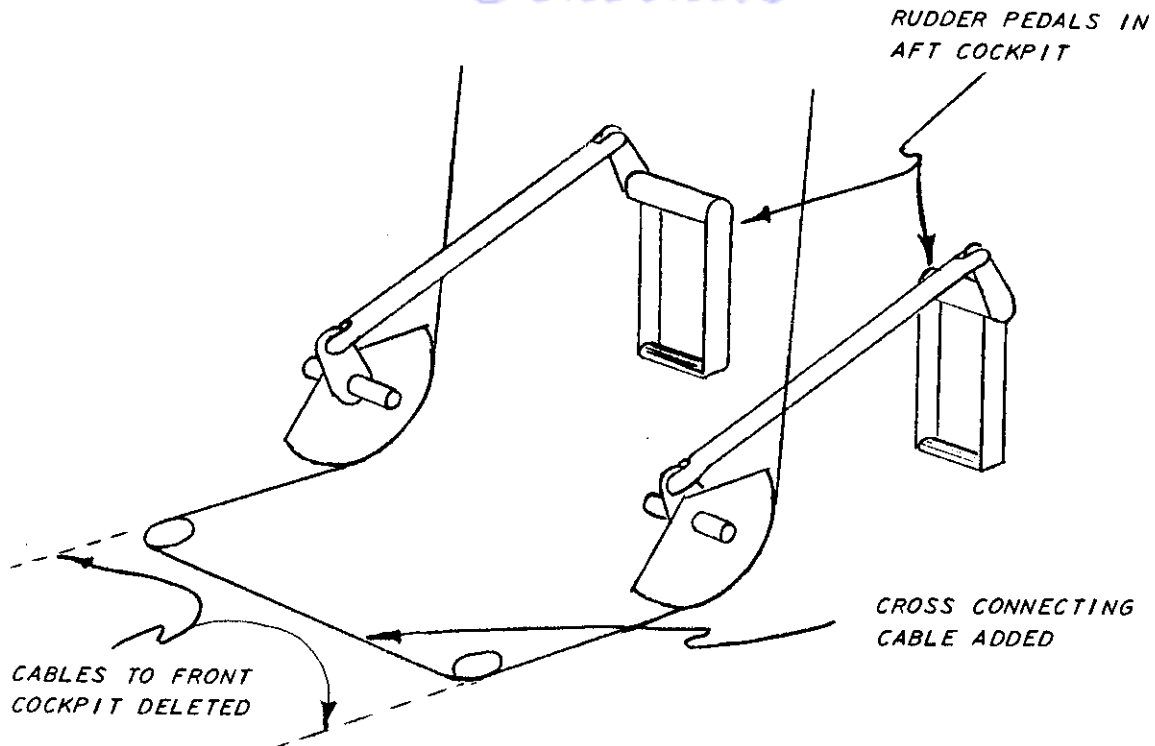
REAR COCKPIT PEDALS, SHOWING CROSS CONNECTING CABLE
